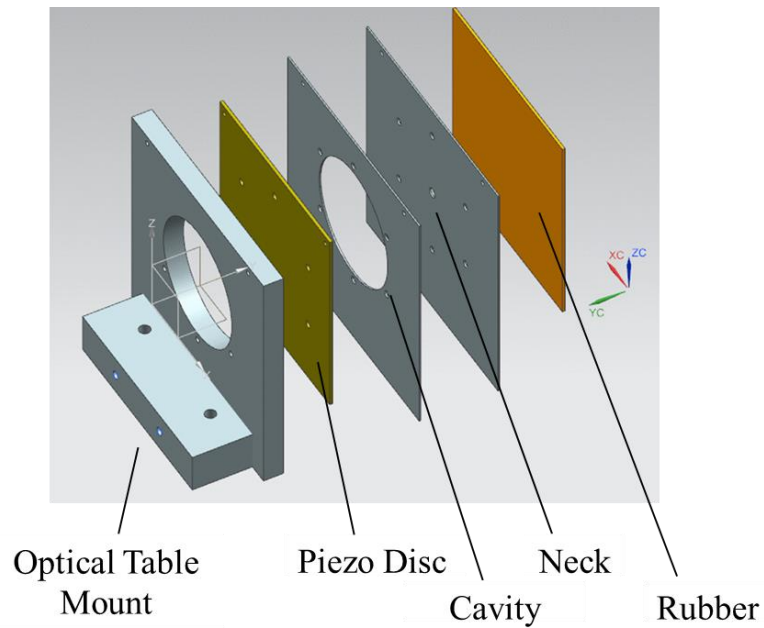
Exploded view of PDOS actuator used for optical table quantification.
